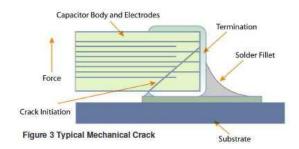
shows that the of the PCB bending is contained within the terminated area of the chip, running from the lower edge of the termination towards the end face. Should it enter the area of electrode overlap, an electrical short circuit may result.
